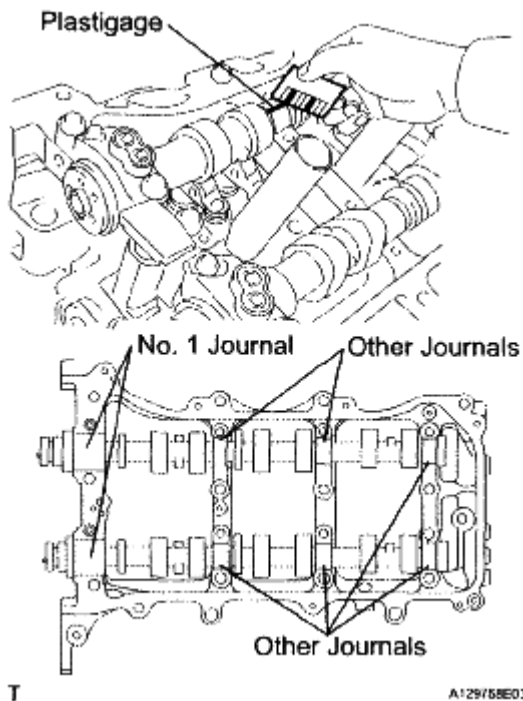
Measuring Plastigage At Camshaft Widest Point
